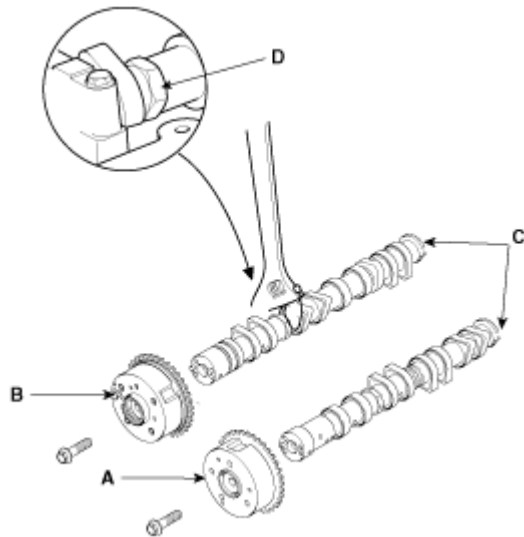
CVVT Assemblies, Camshafts & Wrench Position
